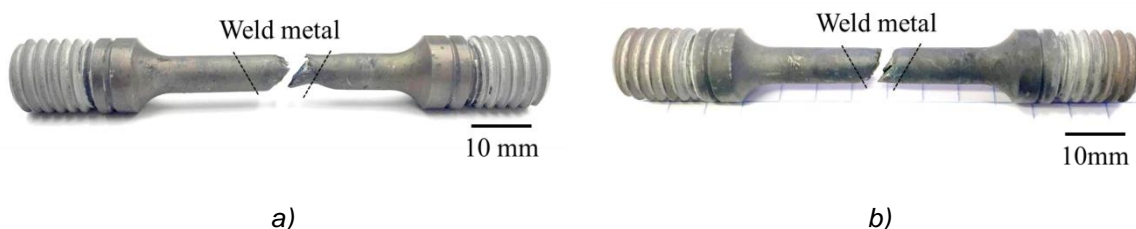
(a) 17Cr2_4 X-weld and (b) 17Cr2_4 X-weld+PWHT creep specimen after rupture (650 °C / 100 MPa)
